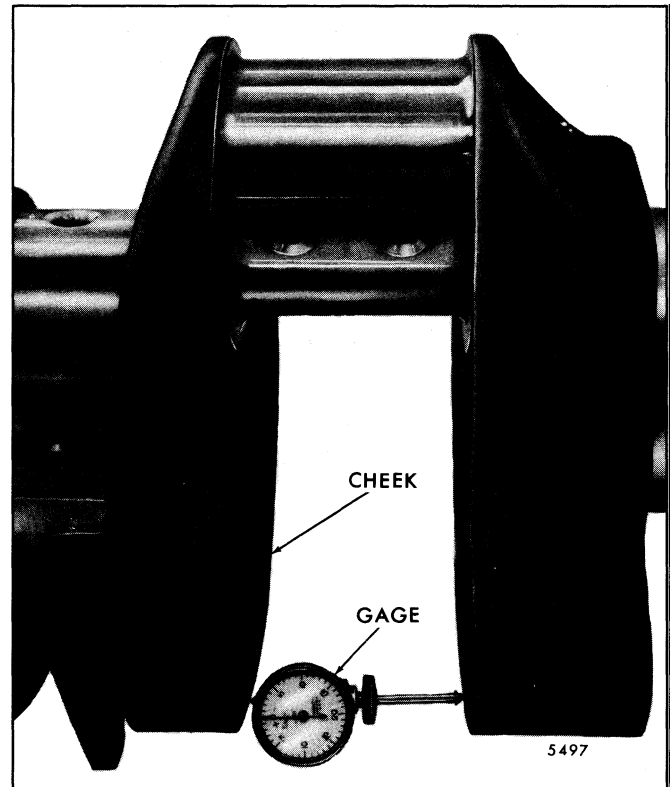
Crankshaft Distortion Measuring Gage Mounted on Crankshaft
